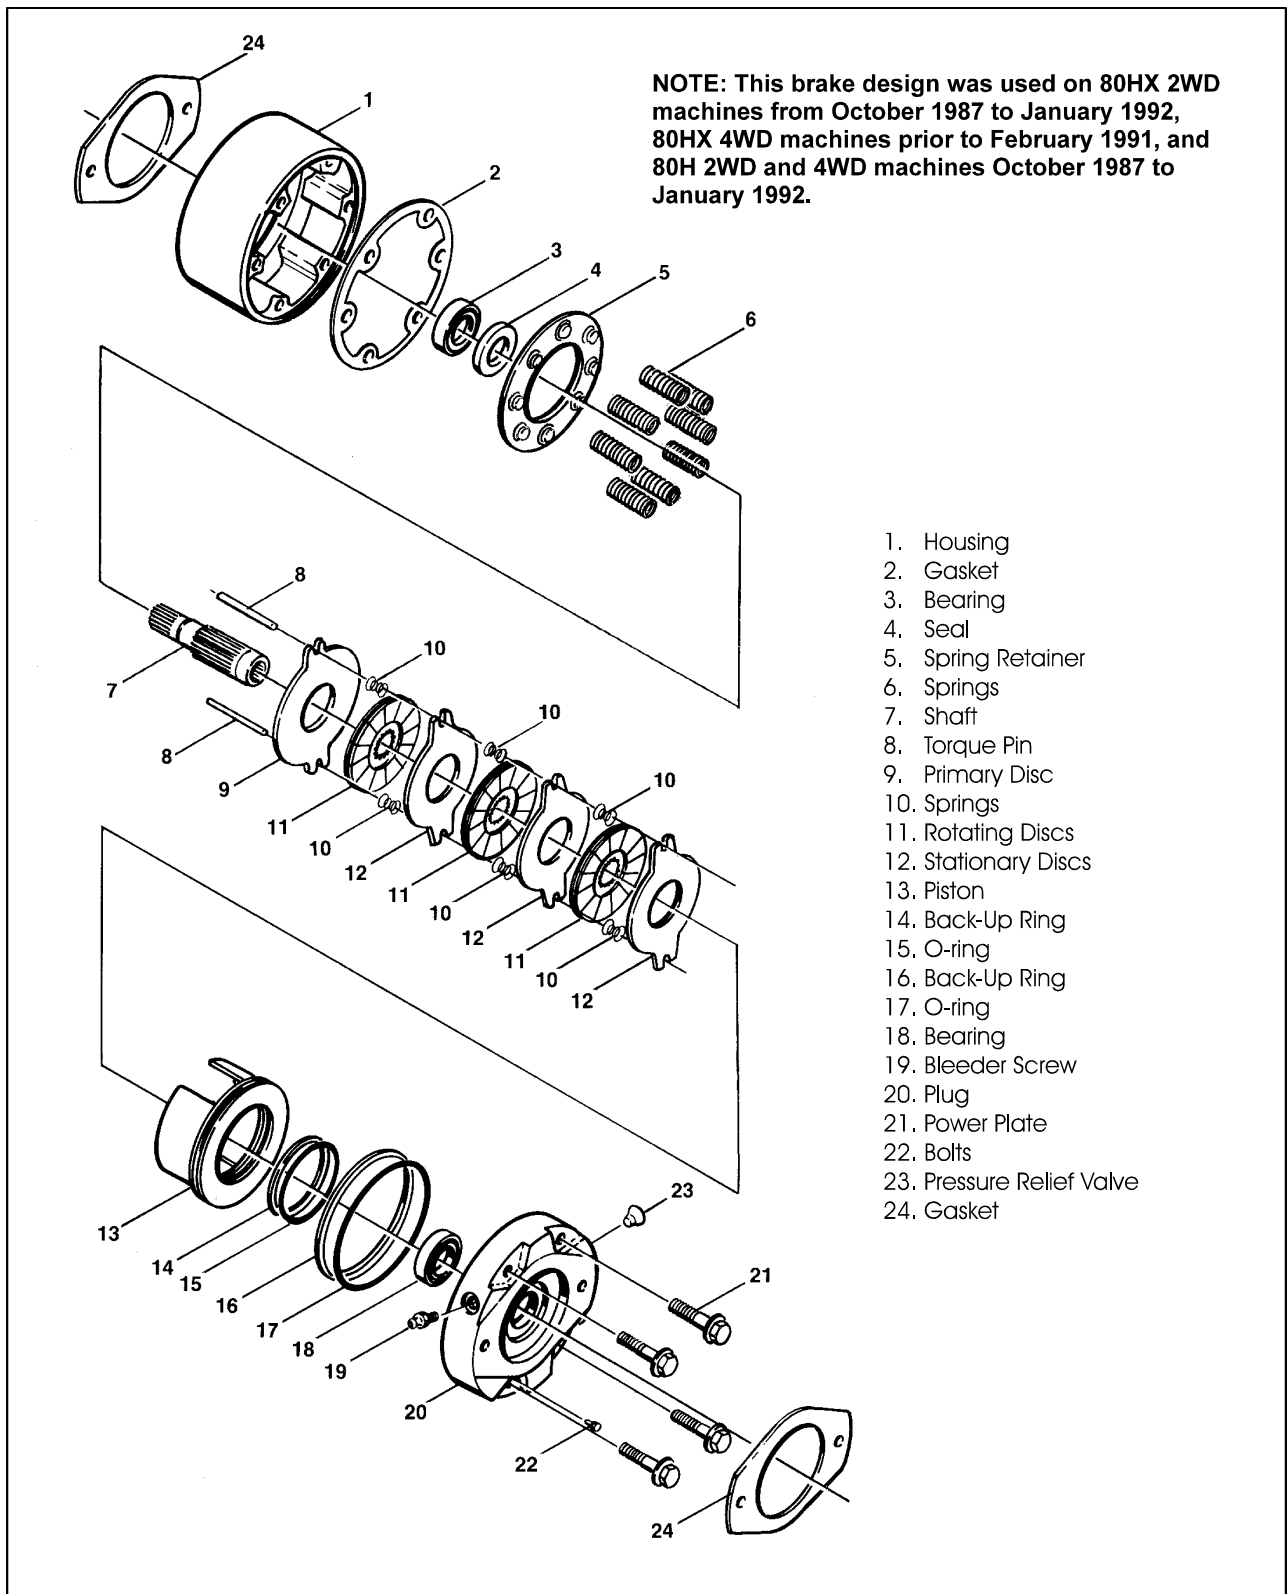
Drive Brake, Ausco - Machines Built Prior to 1992
